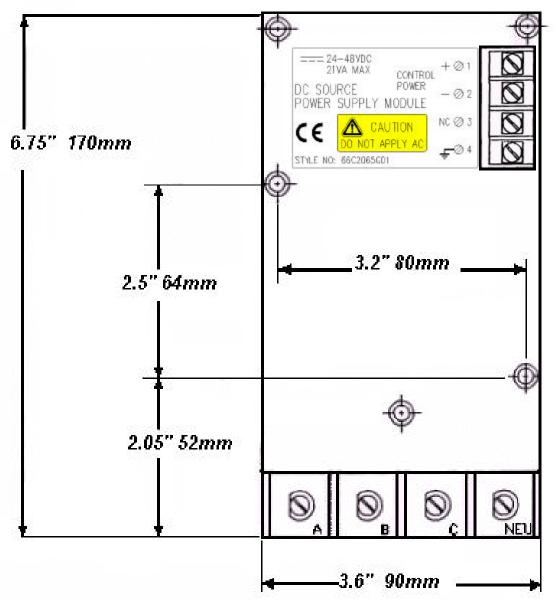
Power Module Physical Dimensions and Mounting Holes
